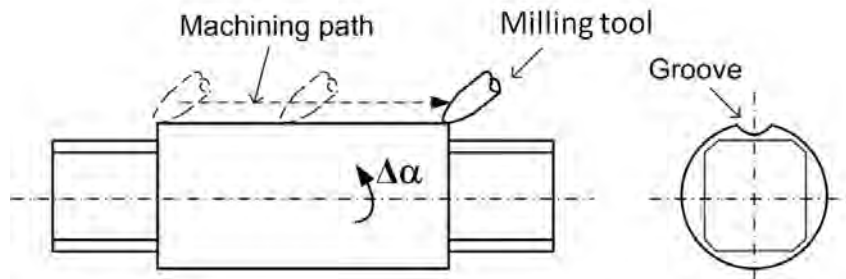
Schematic drawing of milling of axial grooves in SRT tools.
